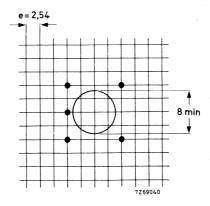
Hole pattern for mounting on a printed-wiring board, hole dia 1,3+0,1 mm
